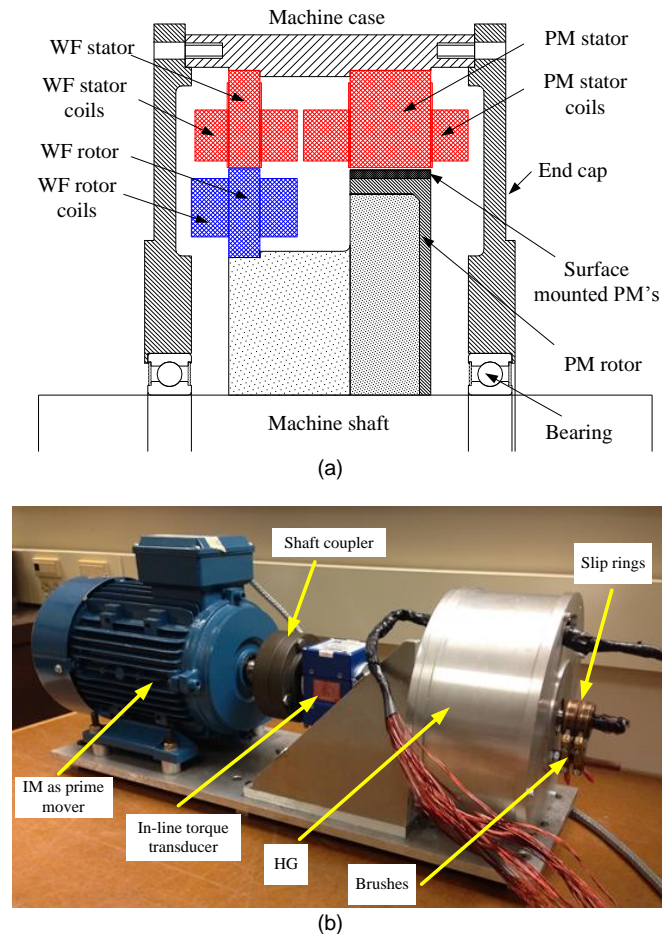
HG Prototype. (a) Machine general assembly. (b) Test-rig.
